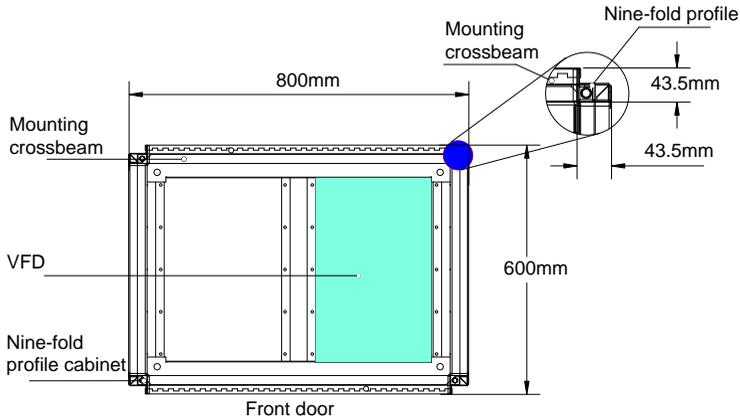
Top view of mounting a 280–630kW VFD in a cabinet
